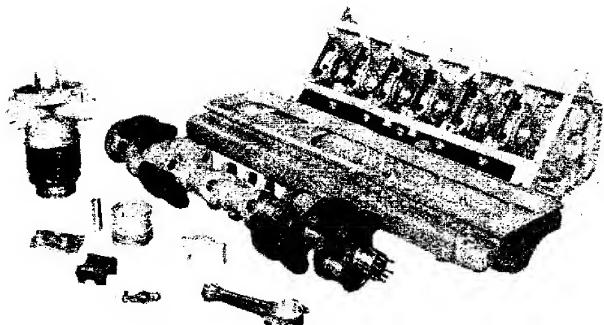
SOME PARTS OF THE AV-1790 ENGINE ON WHICH CRITICAL STRESS HAS BEEN DETERMINED BY EXPERIMENTAL METHODS. CYLINDER HEAD HAS FINS REMOVED TO PERMIT STRESSCOAT TESTS.
